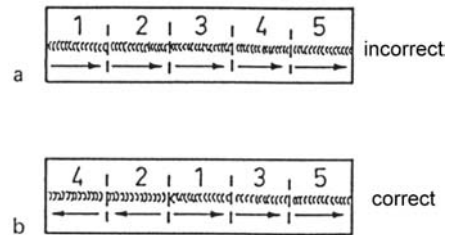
Deposition of long welds. The numbers indicate the sequence of welding.
